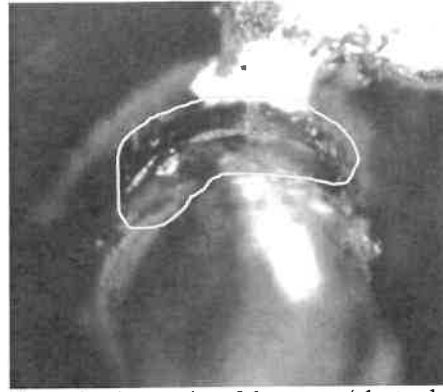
CT scans of the TCO showing the solder bead (Sub 99)
